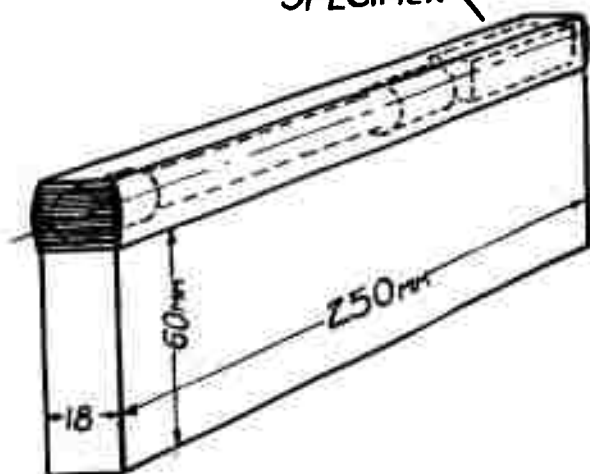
Standard Method of Preparation of All-Weld-Metal Impact and Tensile Specimens Specified by French Society of Welding Engineers and Others for Gas Welding
